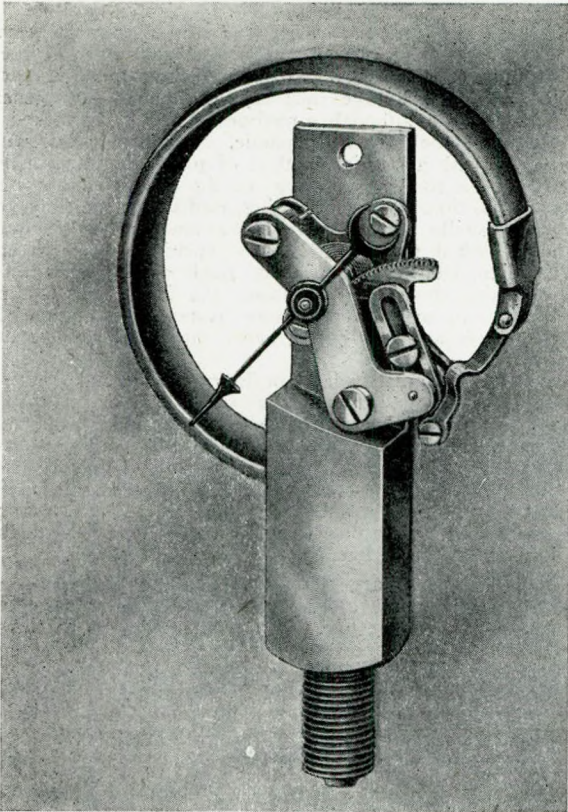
B.—Mounting block for oxygen and acetylene gauges.
